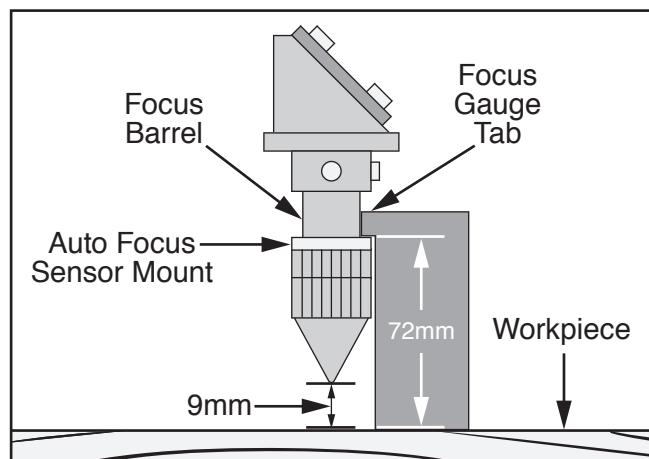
Focus gauge resting on workpiece and auto focus sensor mount.
